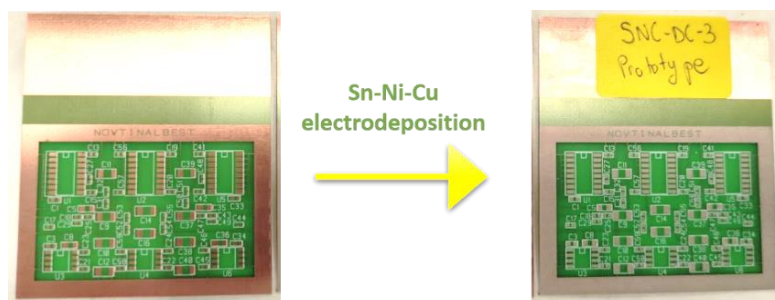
Printed circuit board (PCB) before and after electrodeposition of Sn-Cu-Ni alloy on pilot plant.
